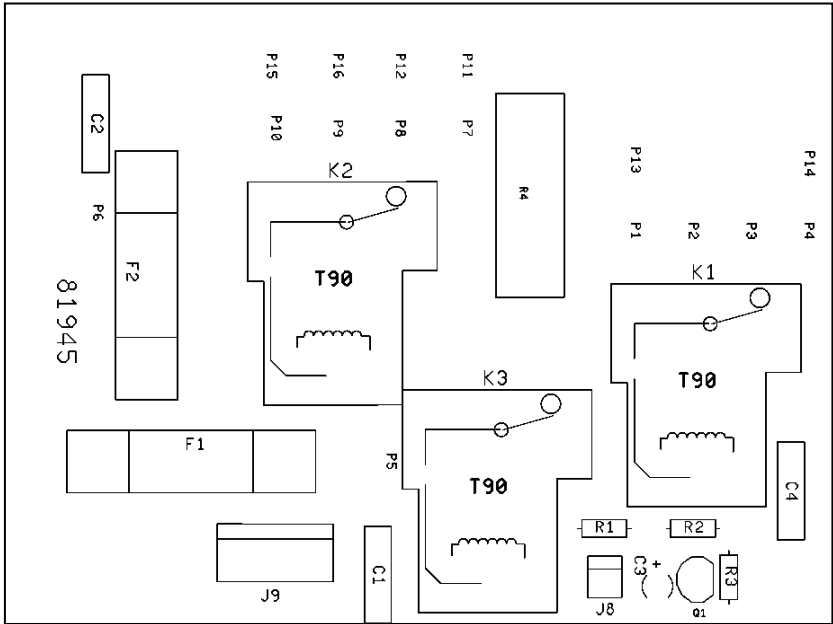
METER/SWITCH BOARD (ASSEMBLY A12)
